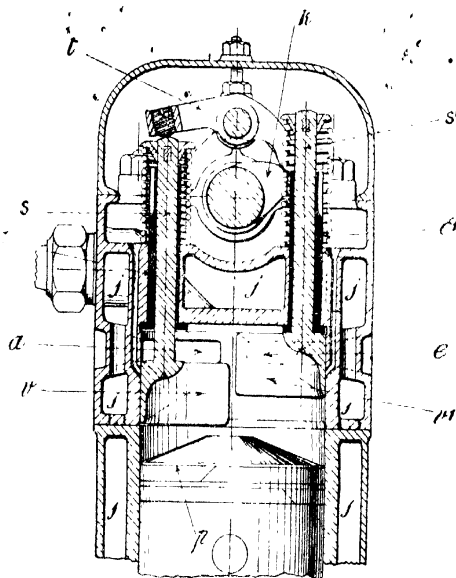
Cross-sectional elevation of cylinder, showing the Stanley slide valve arranged with overhead operating gear
